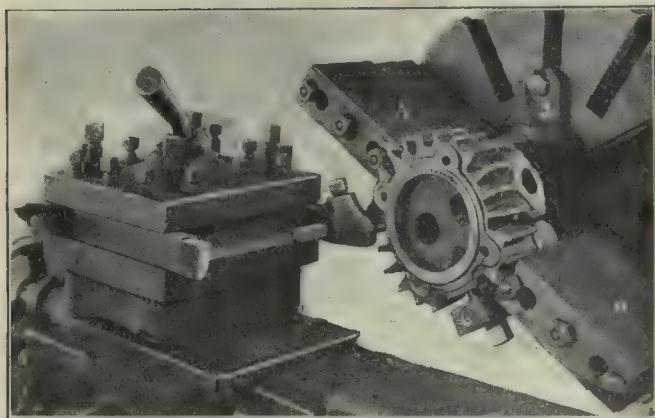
HIGH JAWS REQUIRED FOR HOLDING CYLINDER HEADS
